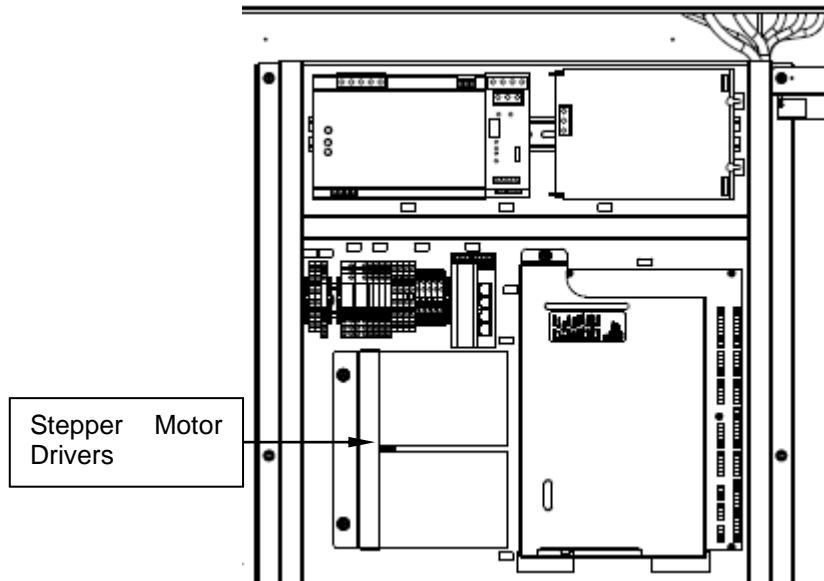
T1 STEPPER MOTOR DRIVERS
